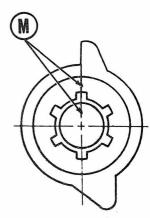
Align marks (M) on ratchet (14—Fig. Y8-20) and shaft (9) when assembling.
